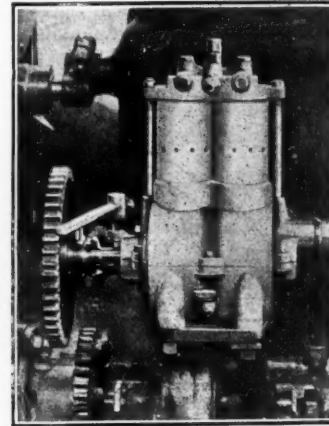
Haynes tire pump, showing mounting, gear drive and starting lever
